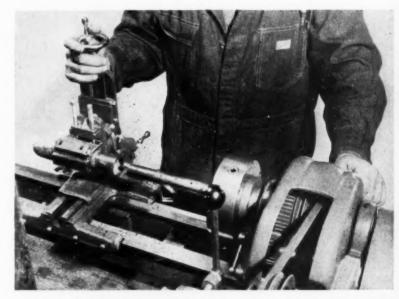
VIBRATOR HOUSING is set up in lathe for reboring, after replacing worn metal with an external layer of stellite, welded on. Housing at left; cutting tool at right.
